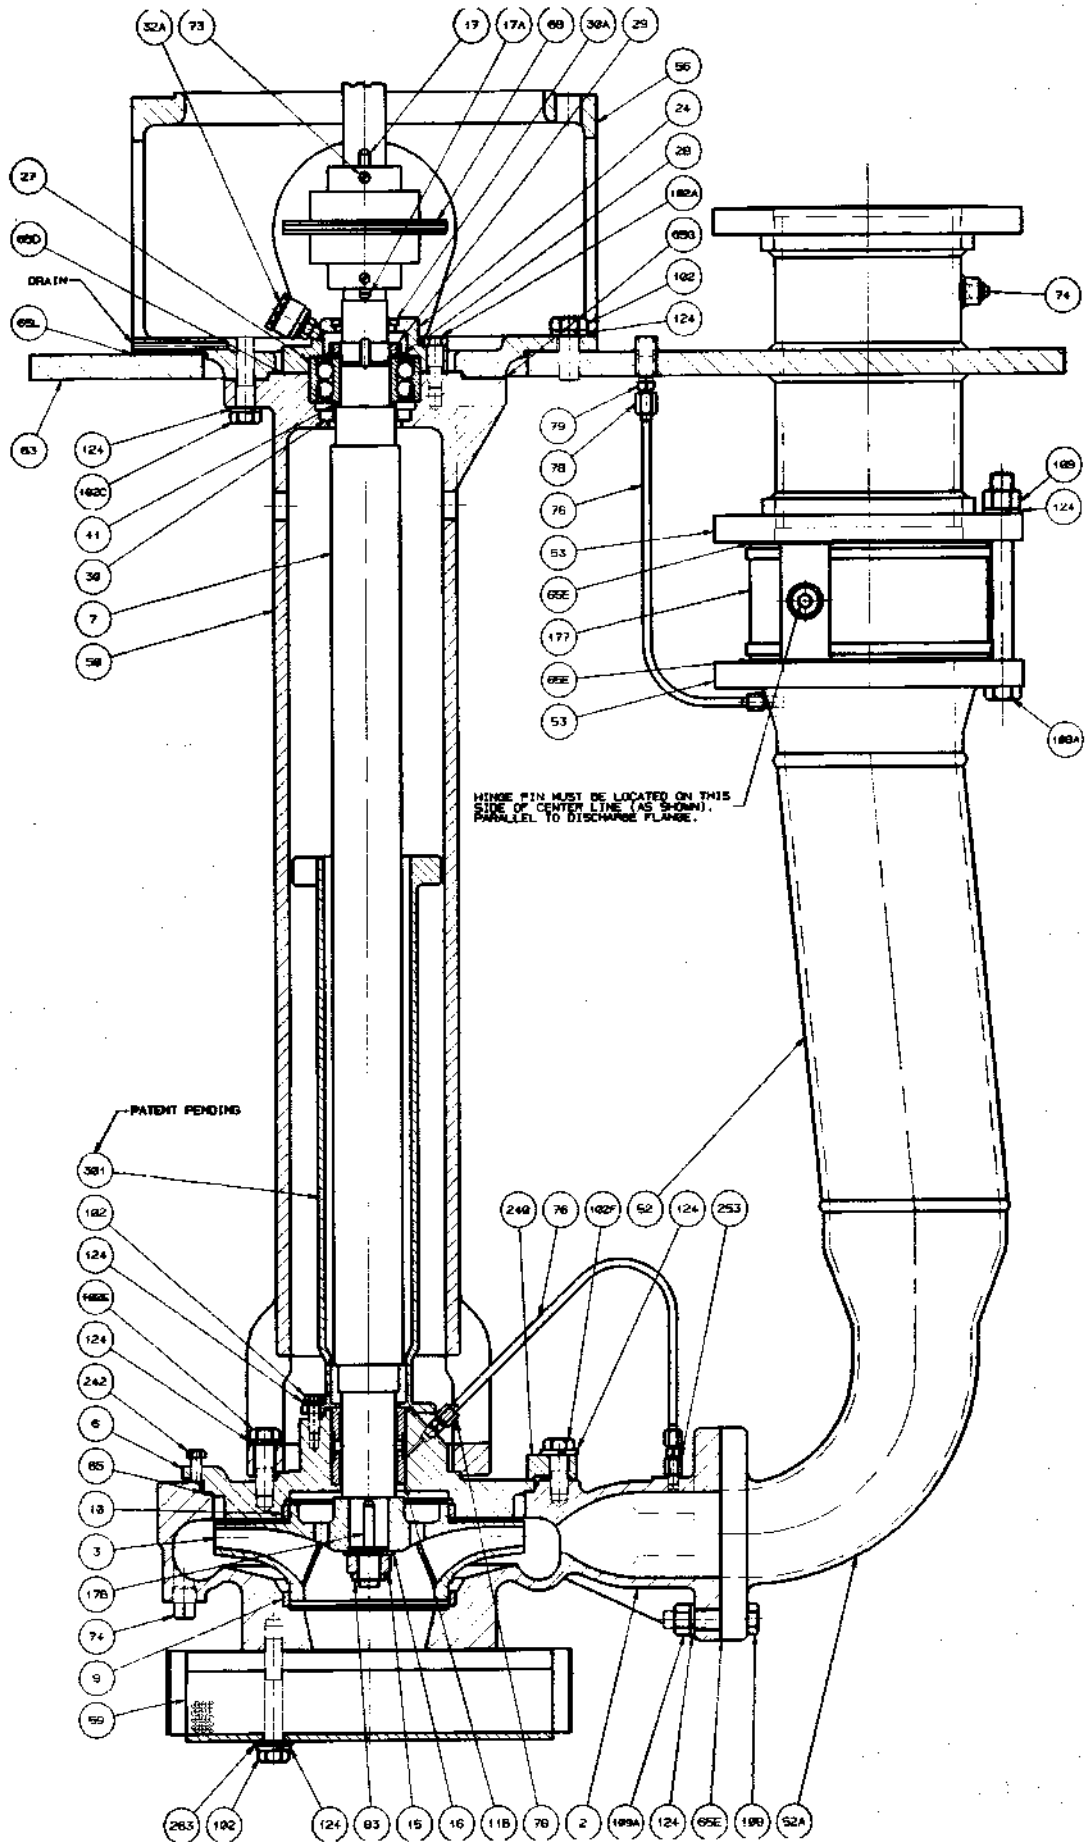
VCRE Vertical Lube Oil Pump with Fabricated Motor Stand and Flat Suction Strainer
